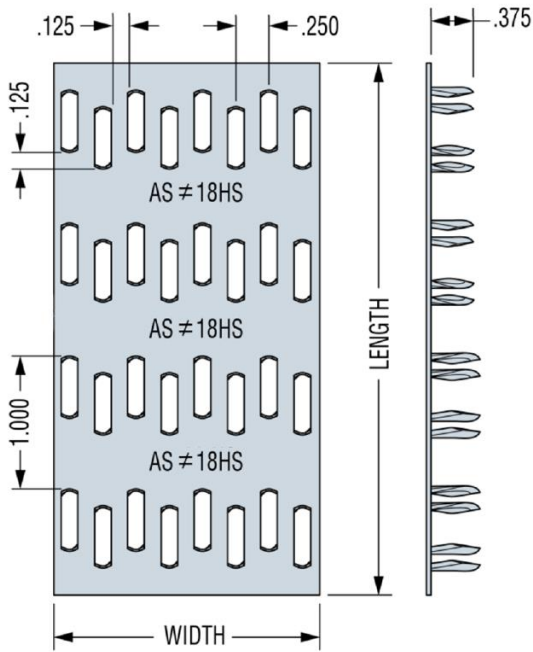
AS 18 CONNECTOR PLATE (DIMENSION IN INCHES)
